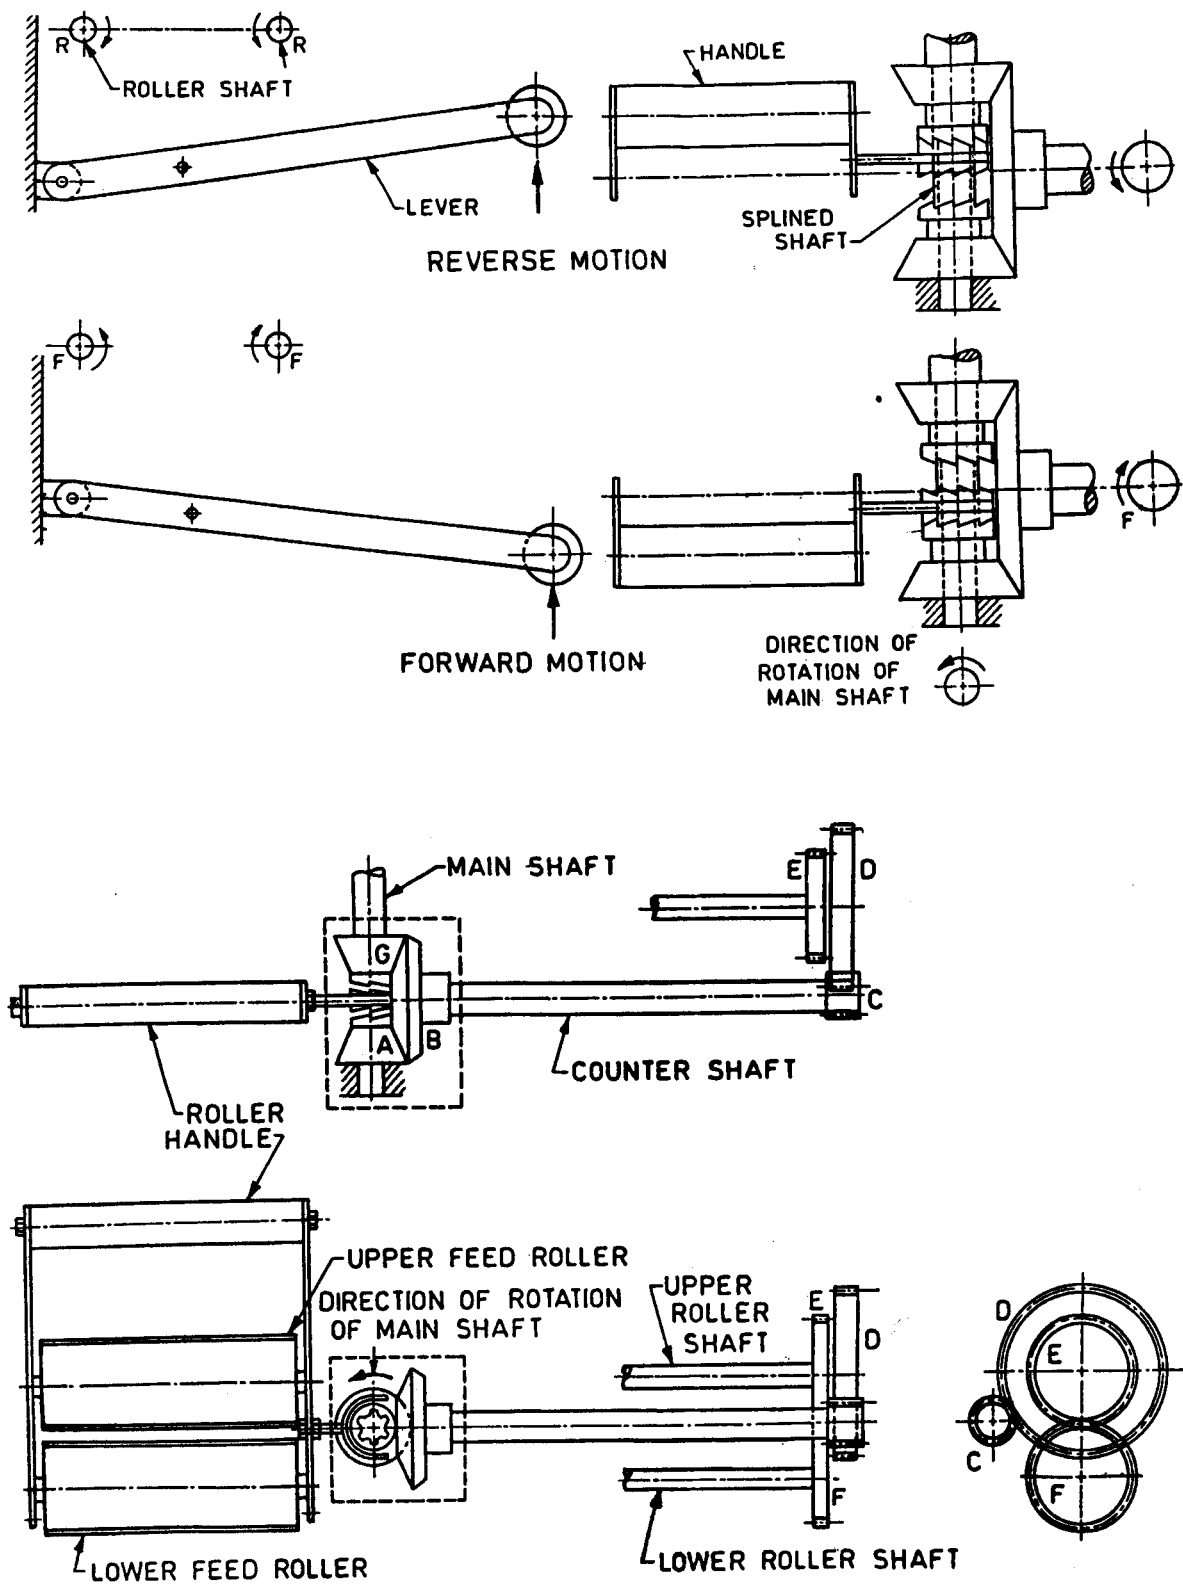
FUNCTIONING OF FEED-REVERSING MECHANISM FOR CONVEYOR FED CHAFF CUTTER
